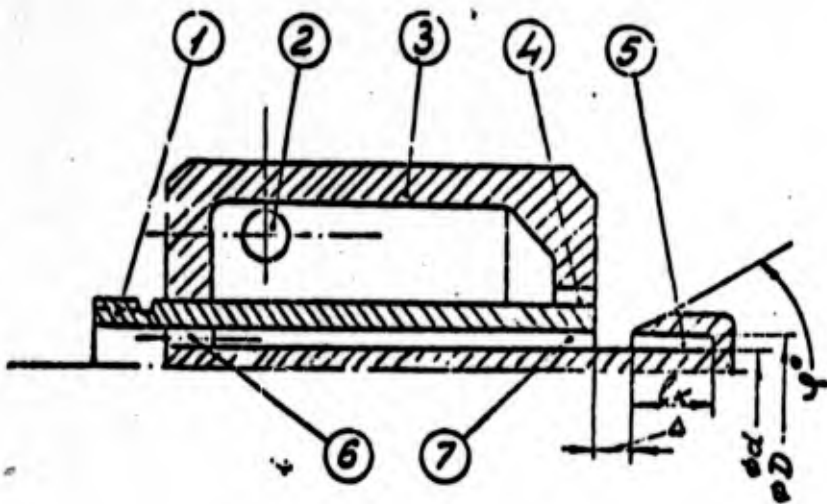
Diagram of injector with generator: 1 - generator casing; 2 - liquid inlet into chamber; 3 - injector casing; 4 - radial clearance for liquid outlet; 5 - generator chamber with rod; 6 - air inlet; 7 - air outlet through annular nozzle.
